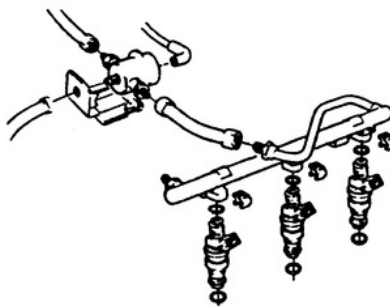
Exploded view of the 2.8L 6-cylinder fuel rail and pressure regulator assembly
